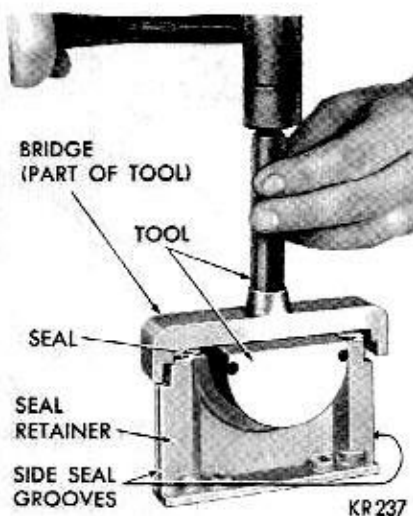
Installing Rear Main Bearing Lower Oil Seal
